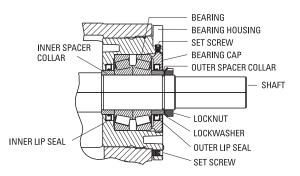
THROUGH G1-222 BEARING HOUSING ASSEMBLY
